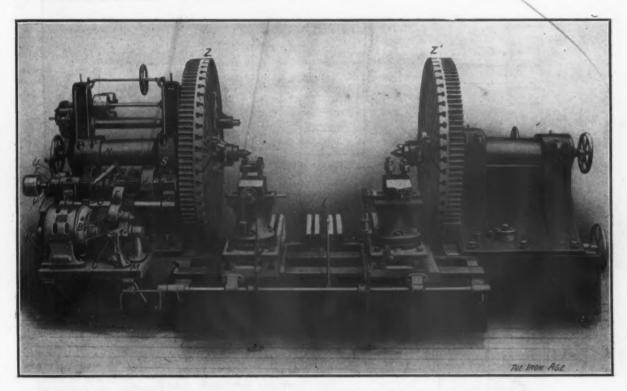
Front View, Showing Motor Mounting and Driving Gearing.
